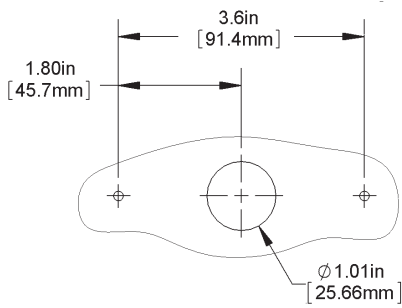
Weather Tight EU or EUO Encl. Mounting Holes and Installation
